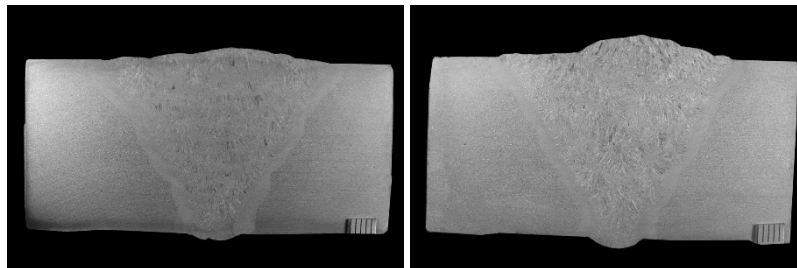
Macrostructure of butt welded joint; methods: 141/111 (left), 141/135 (right)
